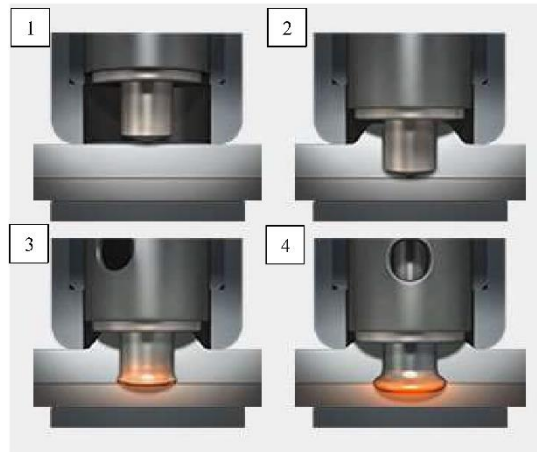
Steps of FEW process: 1) Penetration 2) Cleaning 3) Welding and 4) Compression [48]
